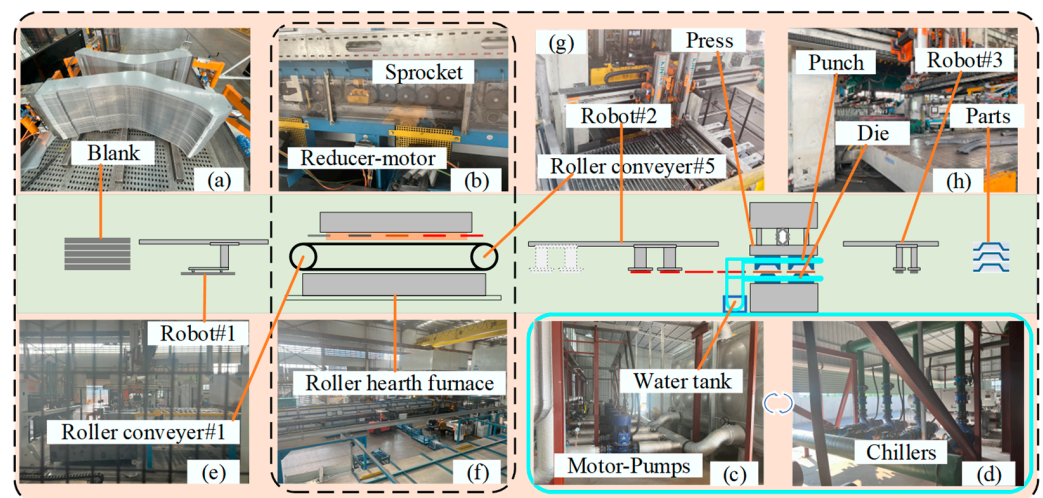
Field conditions of hot stamping production line of roller hearth heating furnace. (a) Blank; (b) Furnace construction; (c) Cooling system; (d) Chillers; (e) Robot and Roller conveyor; (f) Roller hearth furnace; (g) Press; (h) Mold.
